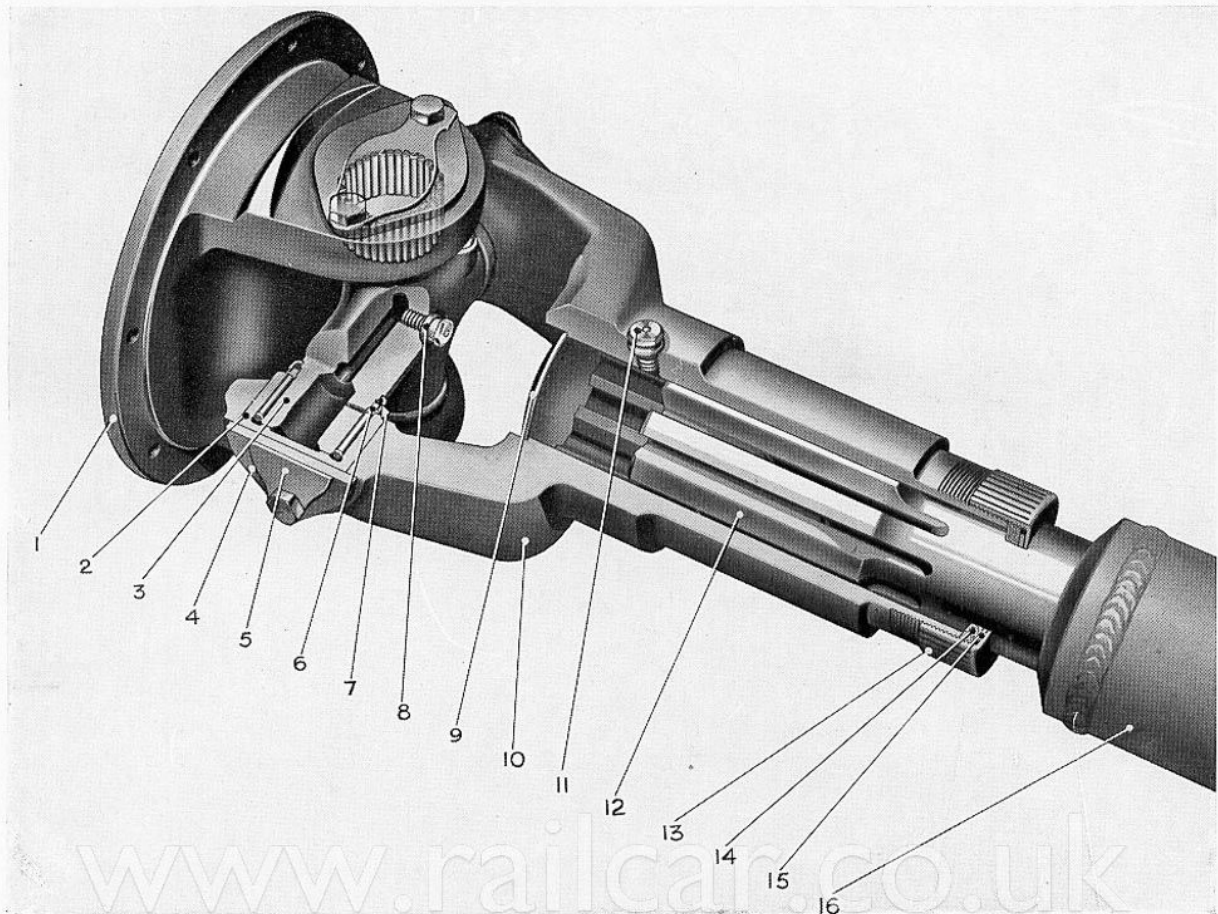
SECTION THROUGH SPICER UNIVERSAL JOINT
